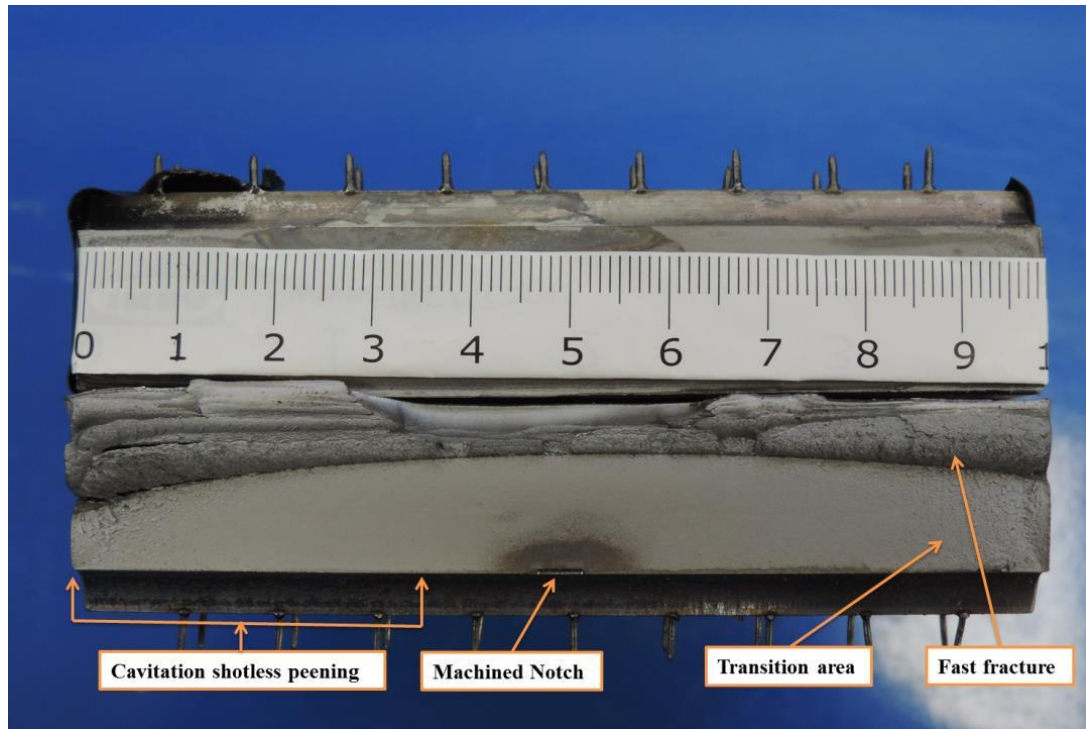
Fracture surface for A30-1 specimen
